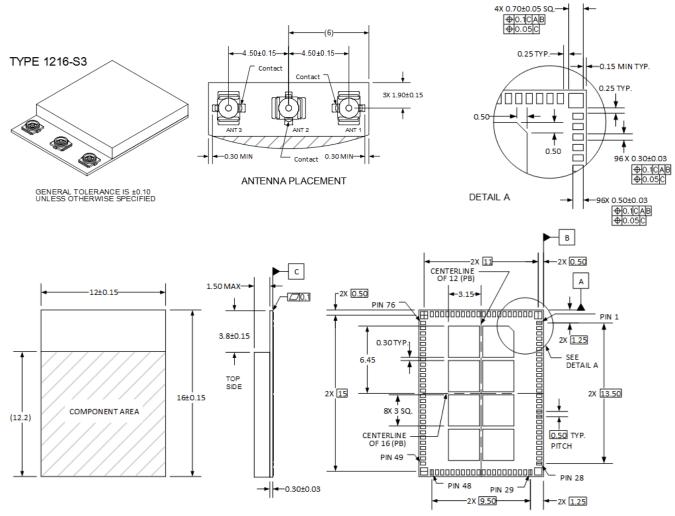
M.2 Type 1216-S3 Mechanical Outline Drawing Example
